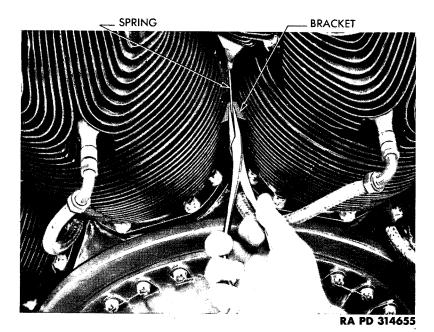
Unhooking Intercylinder Baffle Attaching Spring
